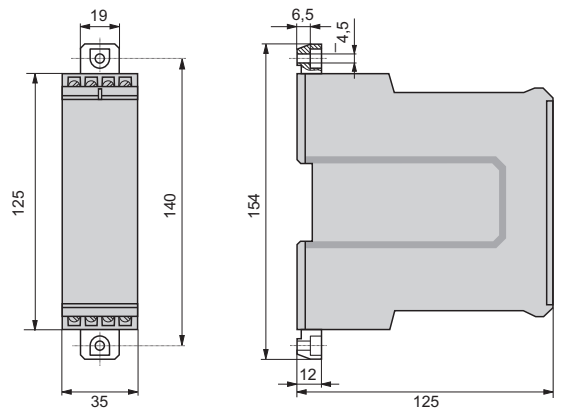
Transducer with the screw hole brackets pulled out for wall mounting.
